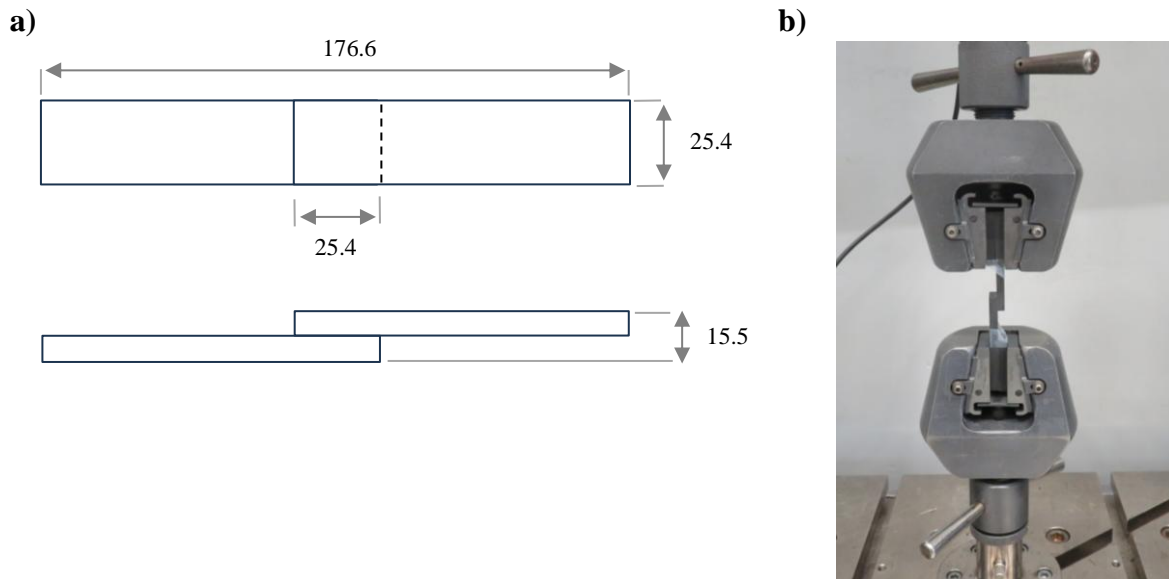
Dimensions of the welded SLS samples in millimeters (a) and a photo of a SLS specimen during test (b).
